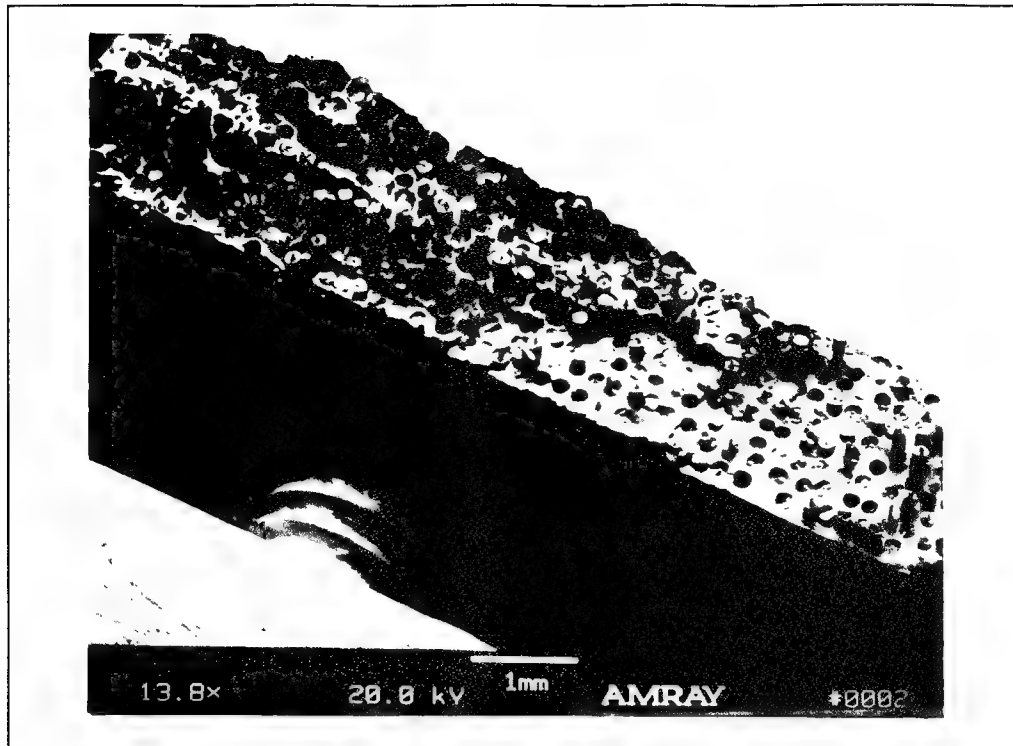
Fracture Surface, 800 MPa, TT HT
